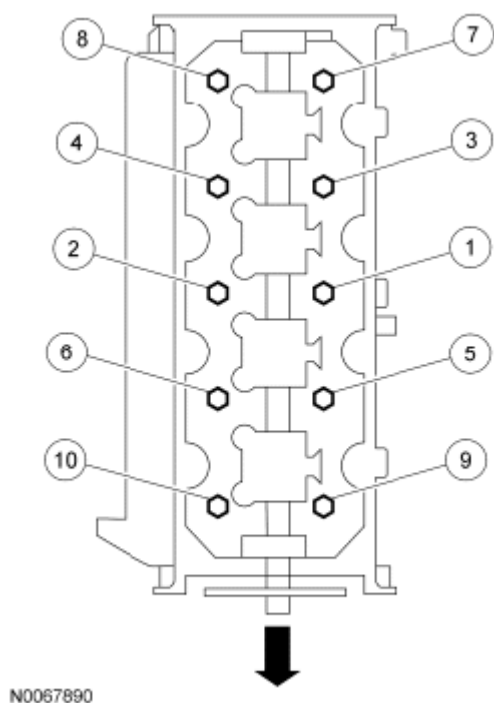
Identifying Cylinder Head Bolts Tighten Sequence
